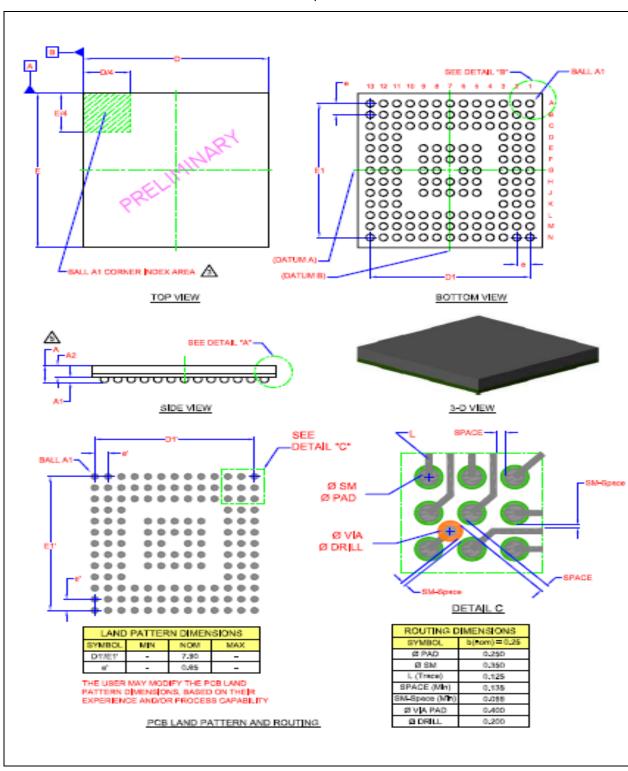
LAND PATTERN DIMENSIONS, 144-WFBGA/SZ
